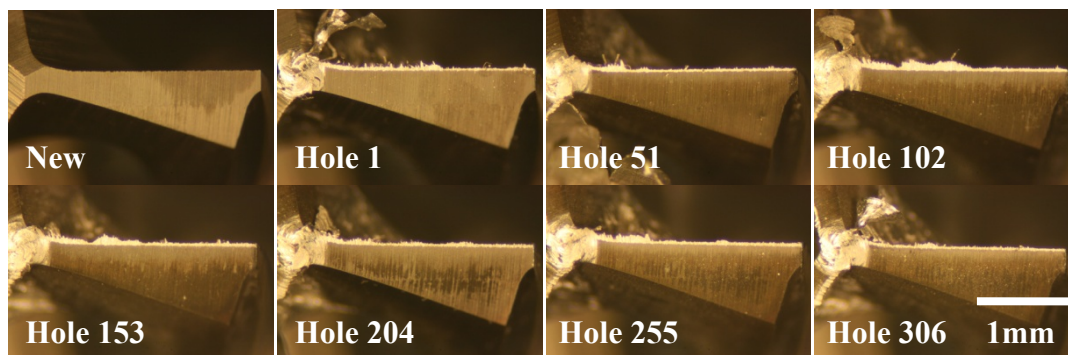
Tool wear micrographs of uncoated carbide drill under 3bar cutting fluid, 130m/min cutting speed (Test 1)
